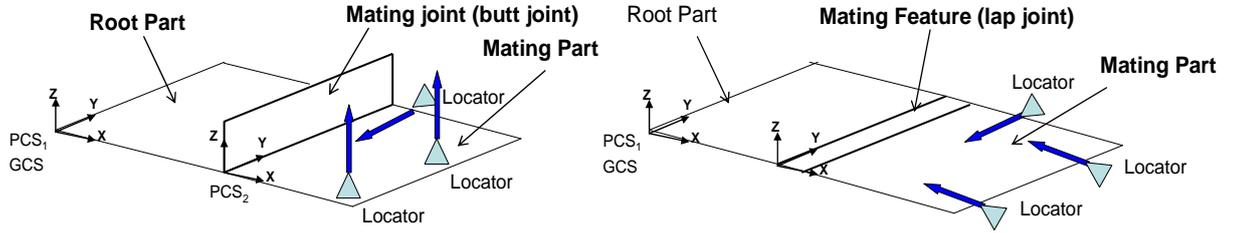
Mating part fixture layouts and their constrained directions subjected to part-to-part design.
